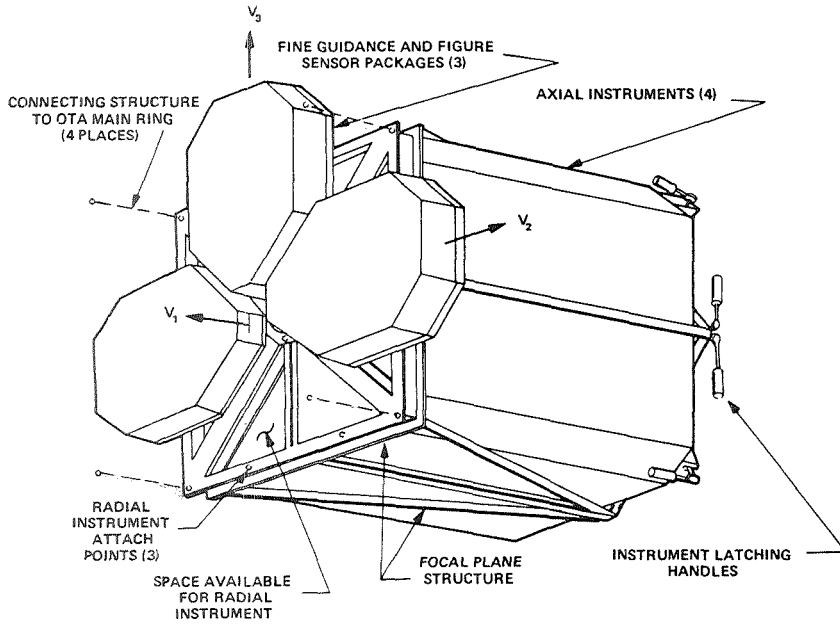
Focal plane assembly, concept 1. (OTA = optical telescope assembly.)
